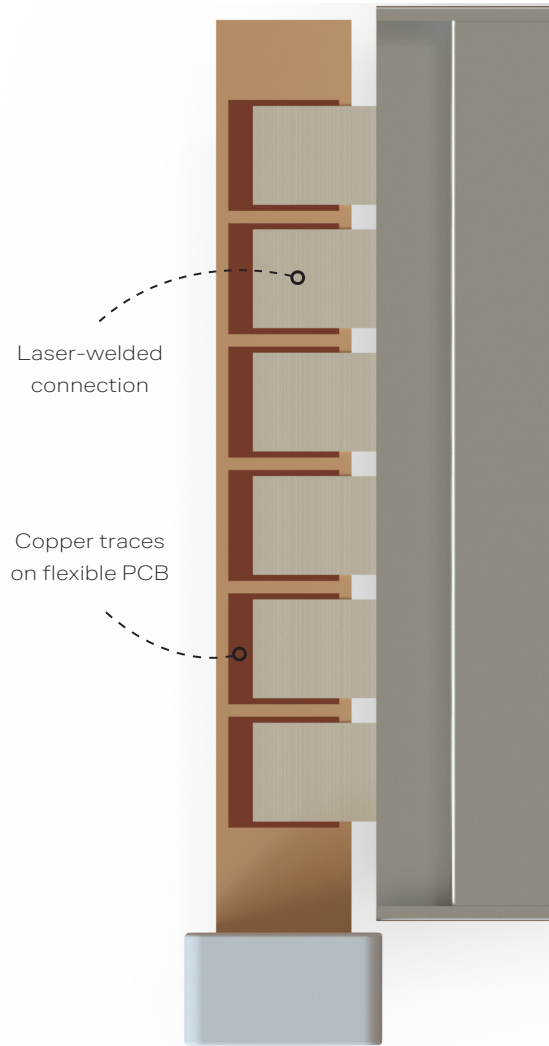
pouch cell tabs are laser-welded to square copper traces on a flexible PCB. This reduces the many required tab connections into one reversible connector.
